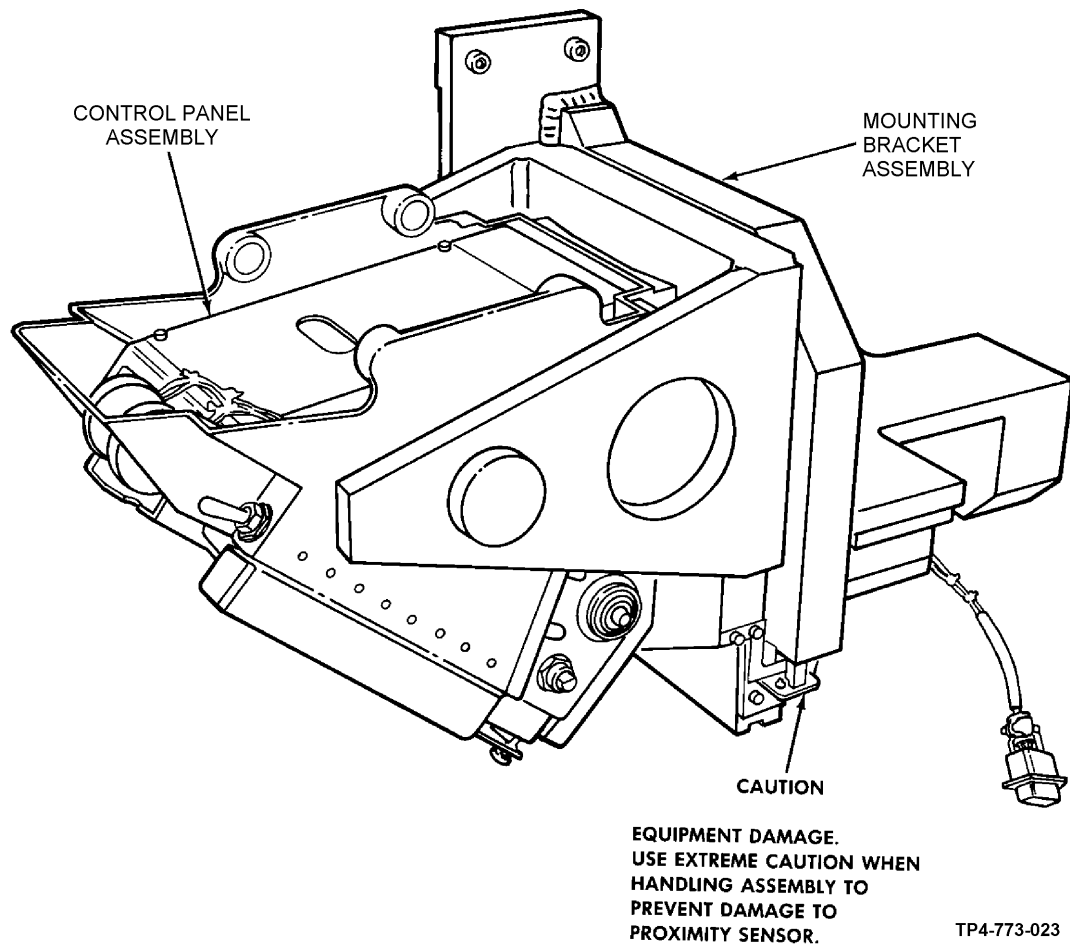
Control Panel Assembly and Attaching Focus Motor Mounting Bracket Assembly
